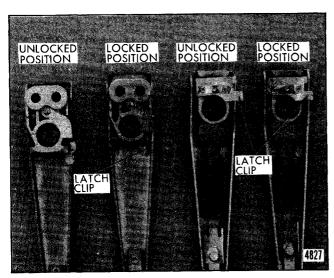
Wiper Arm Latch Clips - E Styles
